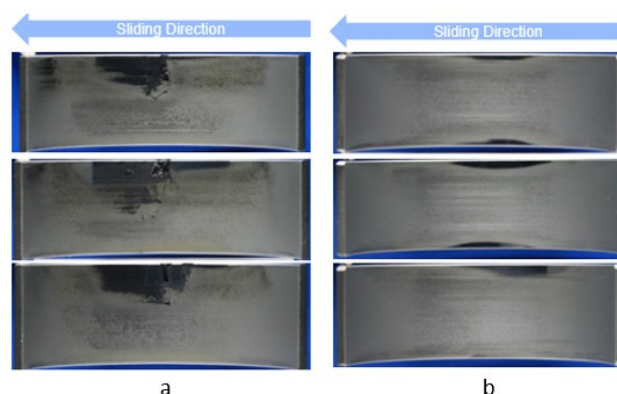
Examples of Sapphire fatigue tested bearings (a) Conventional Al-Sn-Si-Cu + 'B' polymer coating (b) Developed Al-Mn-Mg + 'B' polymer coating
